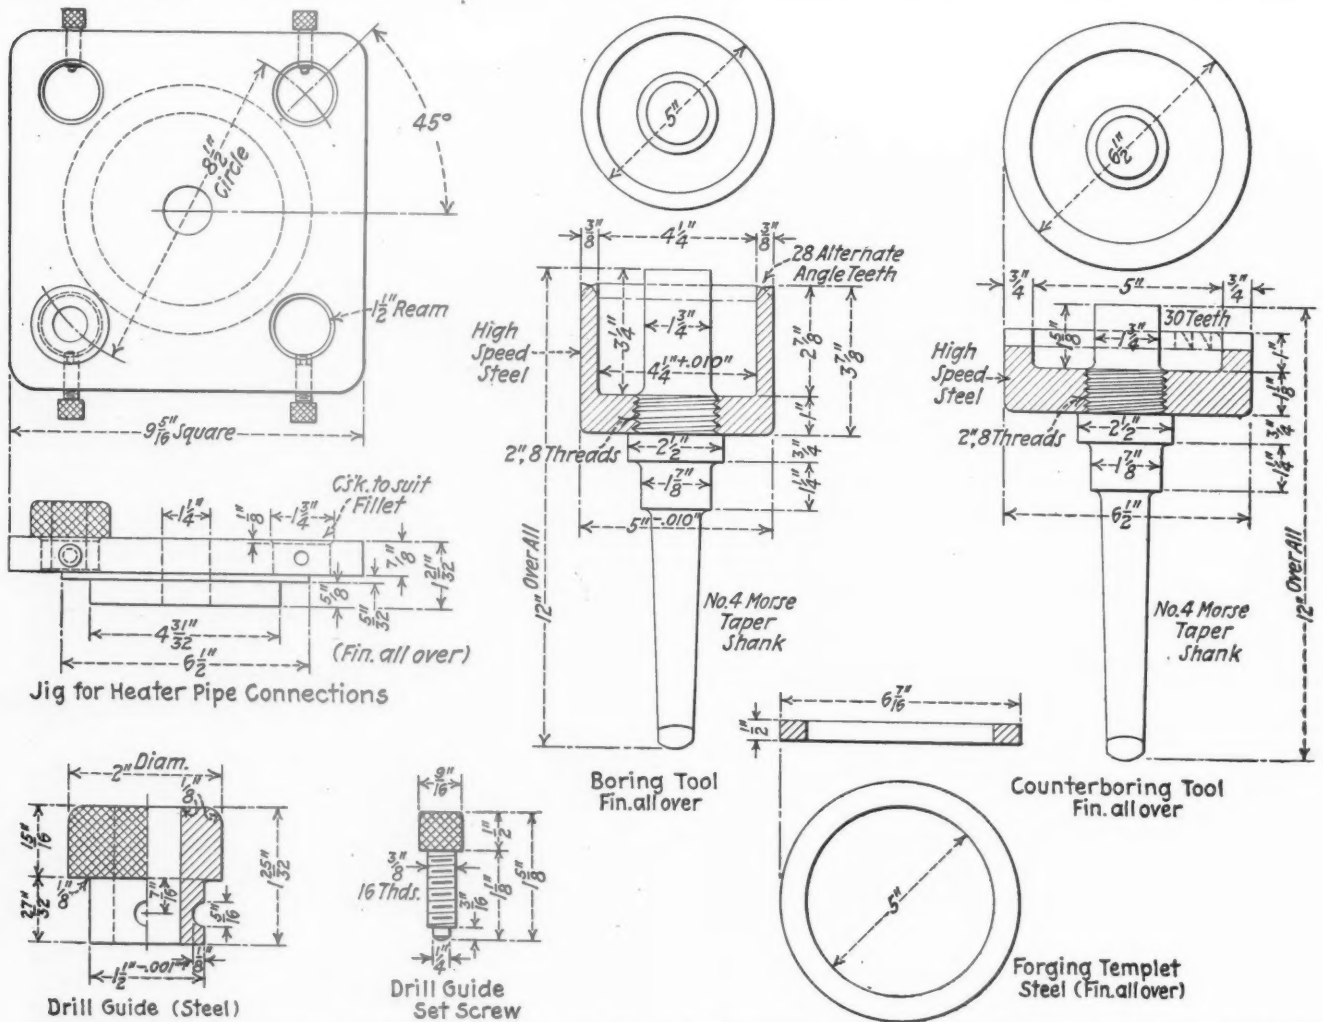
Detailed drawings of the tools used for cutting and tapping the holes in the cylinder saddle for the feedwater heater pipe connection
